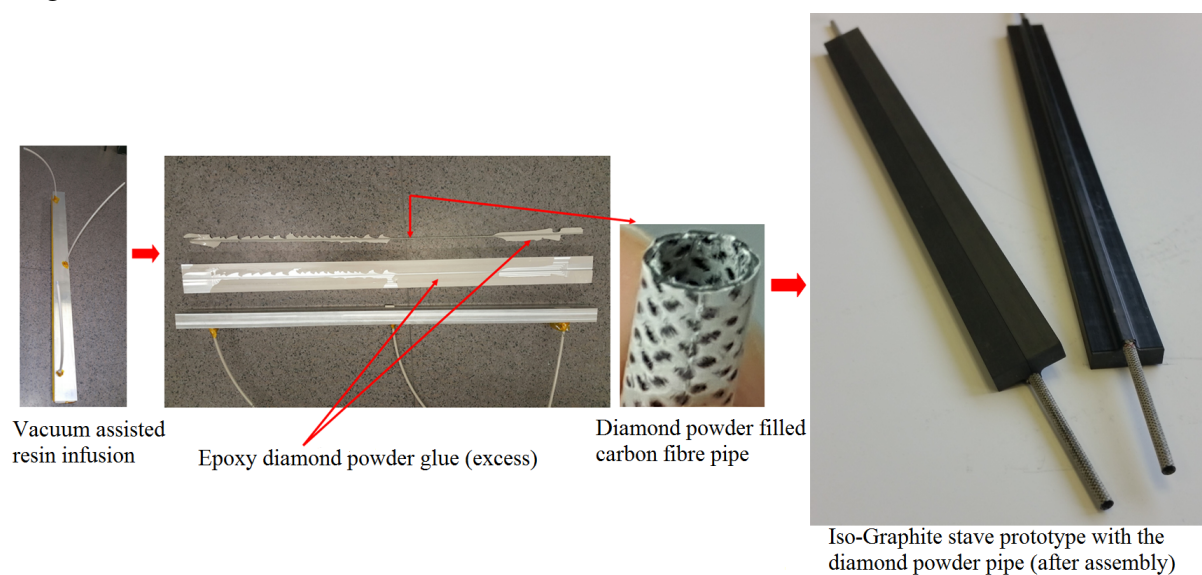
Production process and the assembly of the Iso-Graphite stave prototype with diamond powder filled carbon fibre pipe
